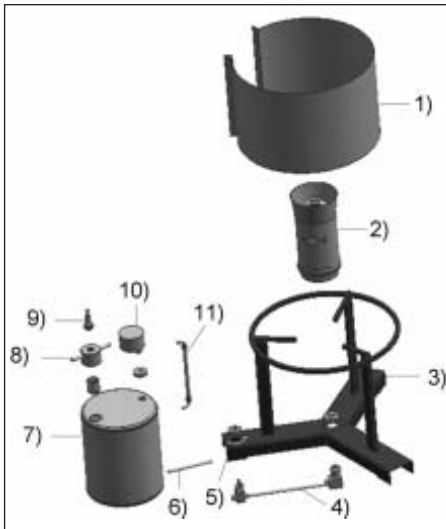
Plant oil stove "Protos" Bosch und Siemens Haugeräte GmbH; 1) windshield, 2) flame holder with vaporizer inside, 3) frame, 4) oil lining with valve, 5) regulation knob, 6) connecting hose between tank and frame, 7) pressure tank, 8) filter neck, 9) air valve, 10) manometer, 11) oil level indicator
